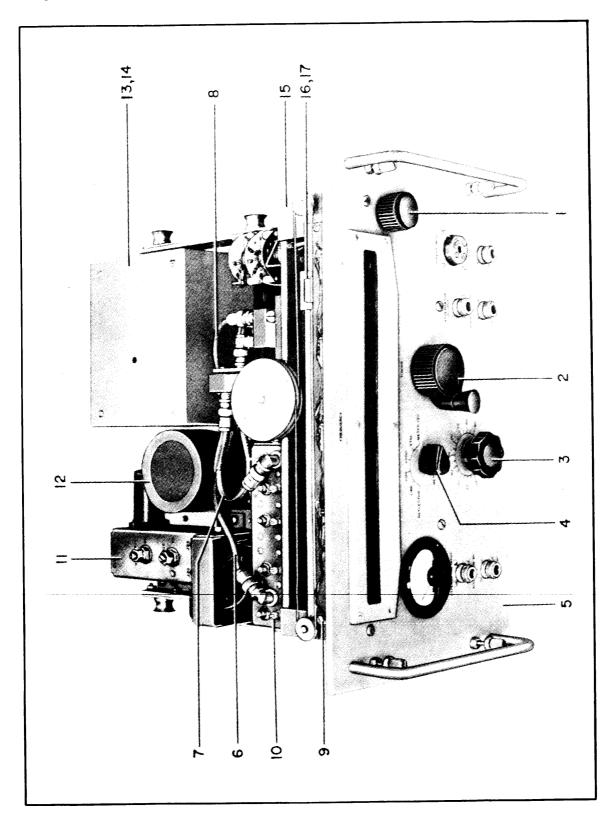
Tuning Head and Panel Assembly (Sheet 1 of 2 Sheets), Index Nos. 1 through 17
